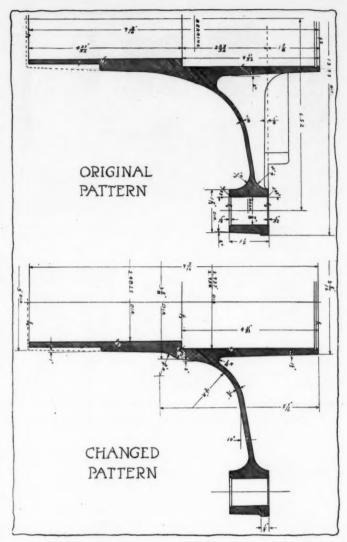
The slight changes made in the pattern transformed the casting from a failure into a success
